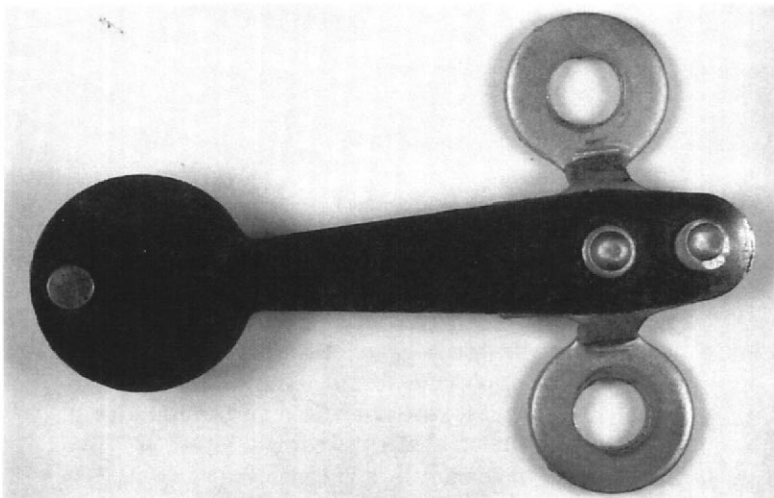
Beginning in mid-April 1924 the vibrator contact spring base was redesigned. The two mounting screws were replaced by riveting the vibrator spring directly to the base. Thereafter, both the base and the spring would have to be replaced as a unit.
